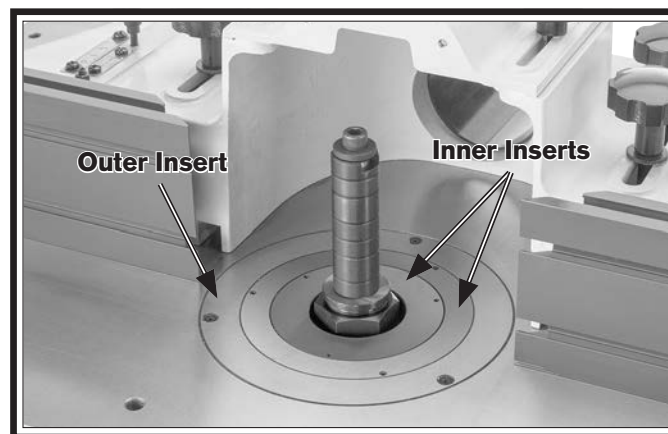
Location of inner two inserts (front cutter guard removed for clarity).
